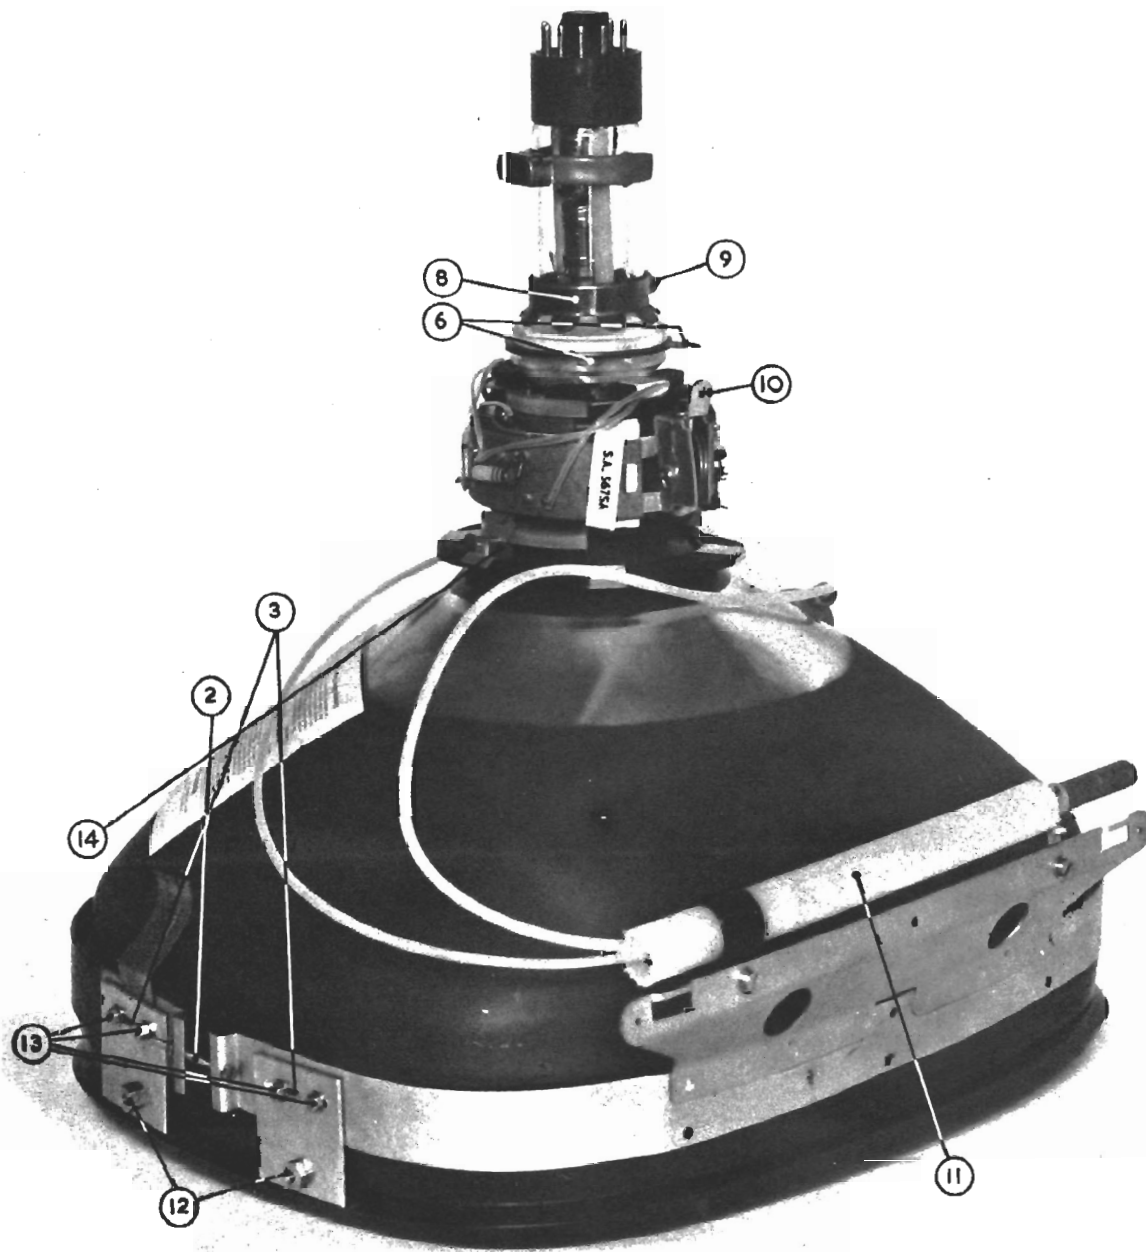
14-inch Monitor: C.R.T. Assembly Ready for Insertion into Cabinet
